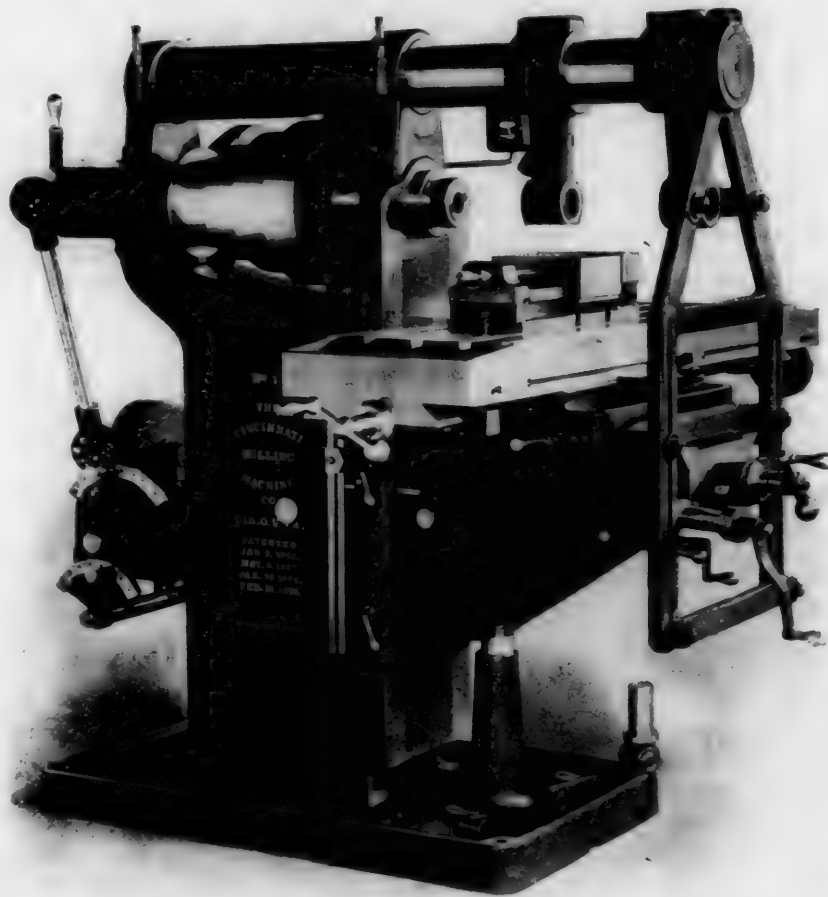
NO. 4 PLAIN CINCINNATI MILLING MACHINE.
